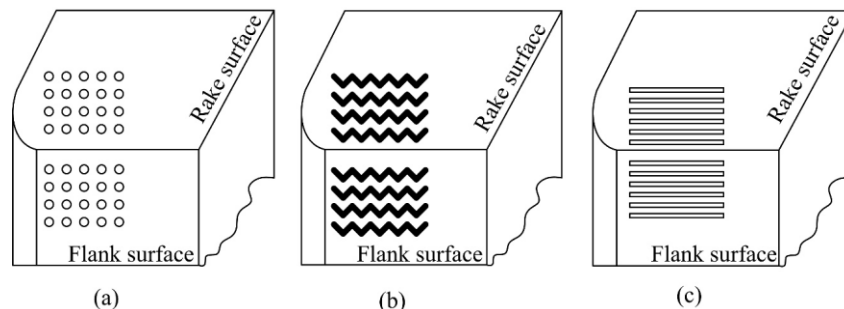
Rake and flank face textured tool (a) dimples, (b) waves, and (c) channels [32]
